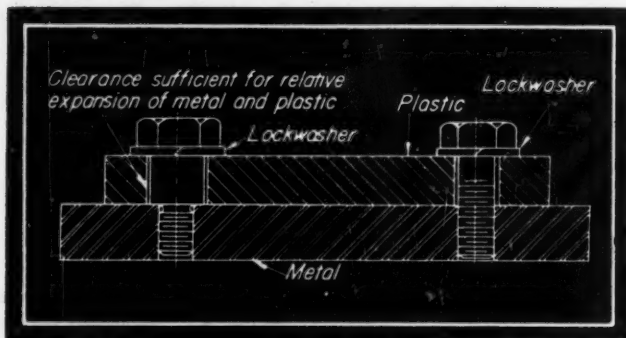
In bolted plastic-to-metal assemblies, clearance holes should be sufficiently large to permit relative expansion of the plastic and metal members
